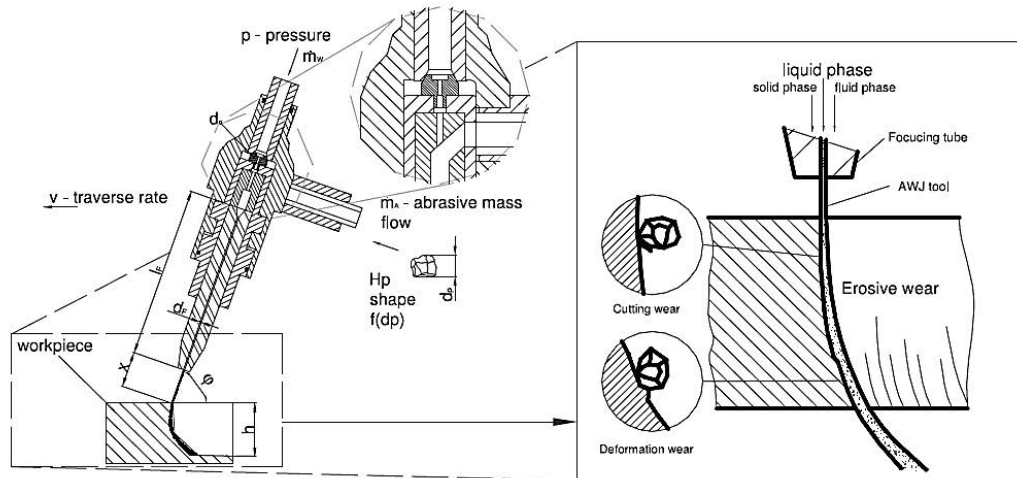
The high-pressure entrainment-style abrasive waterjet cutting principle [13].
